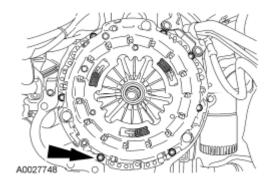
Locating Clutch Pressure Plate And Clutch Disc Bolts Courtesy of FORD MOTOR CO.
